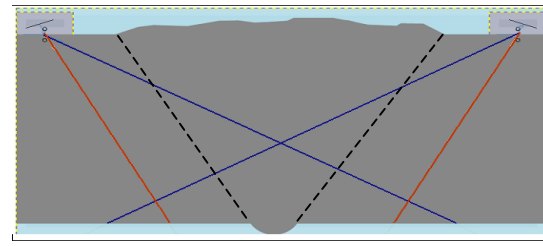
Typical TOFD probe setup at adjacent sides of a weld. Note weld cap and root.
